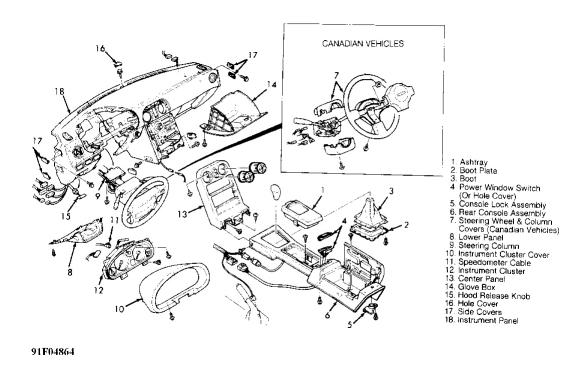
Exploded View of Instrument Panel Courtesy of MAZDA MOTORS CORP.
